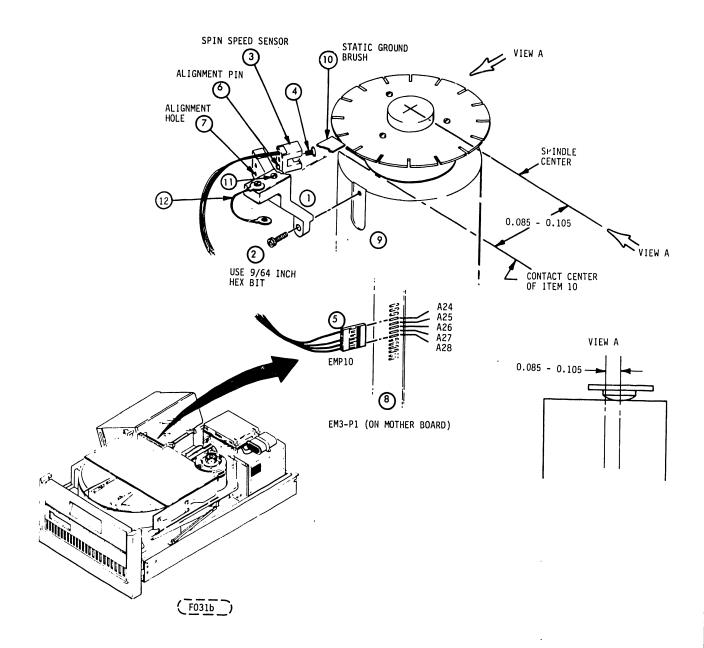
REMOVAL AND REPLACEMENT OF SPIN SPEED SENSOR ASSEMBLY
